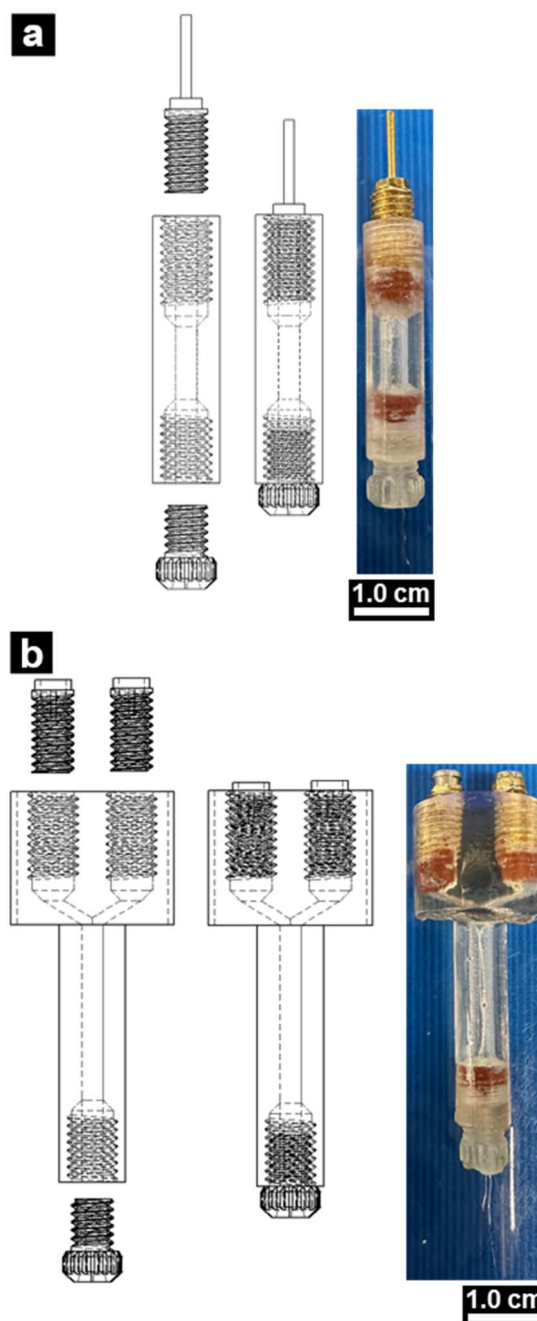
Nanopipette microelectrode holders. (a and b) SOLIDWORKS drawings of an exploded view (left), assembled view (middle) and an image (right) of the fabricated single (top) and theta (bottom) electrode holders, respectively.
